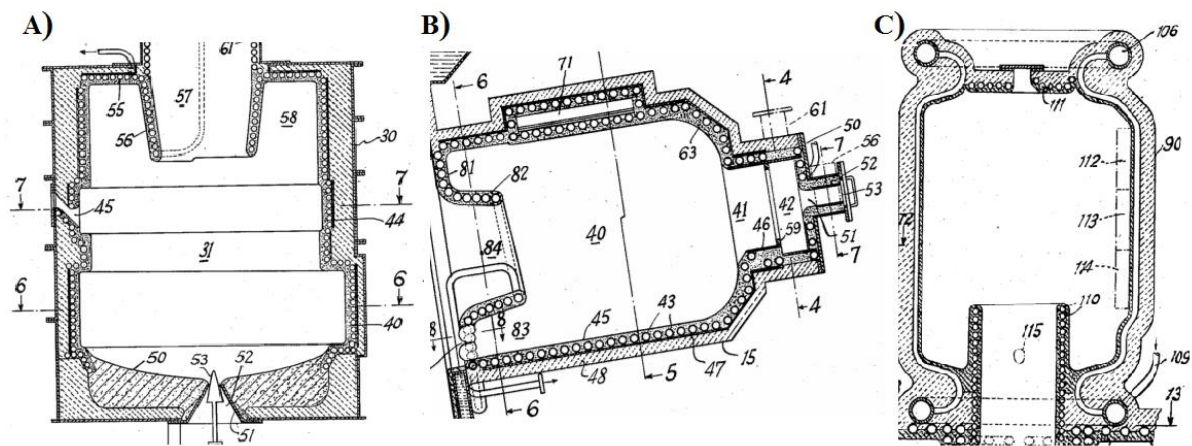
Vertical cross section illustrations of early cyclone burner designs – a) B&W patent drawing (US2357302) [45] b) B&W patent drawing (US2357301) [52] c) B&W patent drawing (US2357303) [22]
